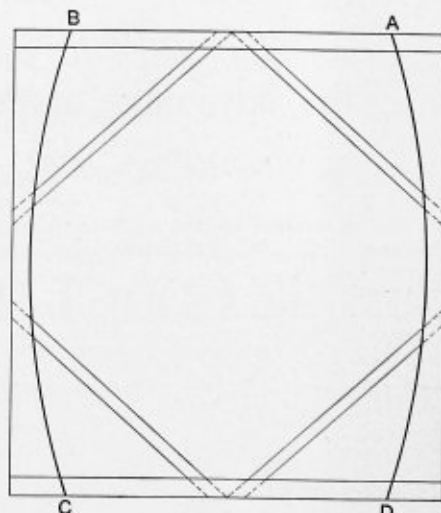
FORM OR FRAME TO MARK SHEET AFTER BEING DISHED
